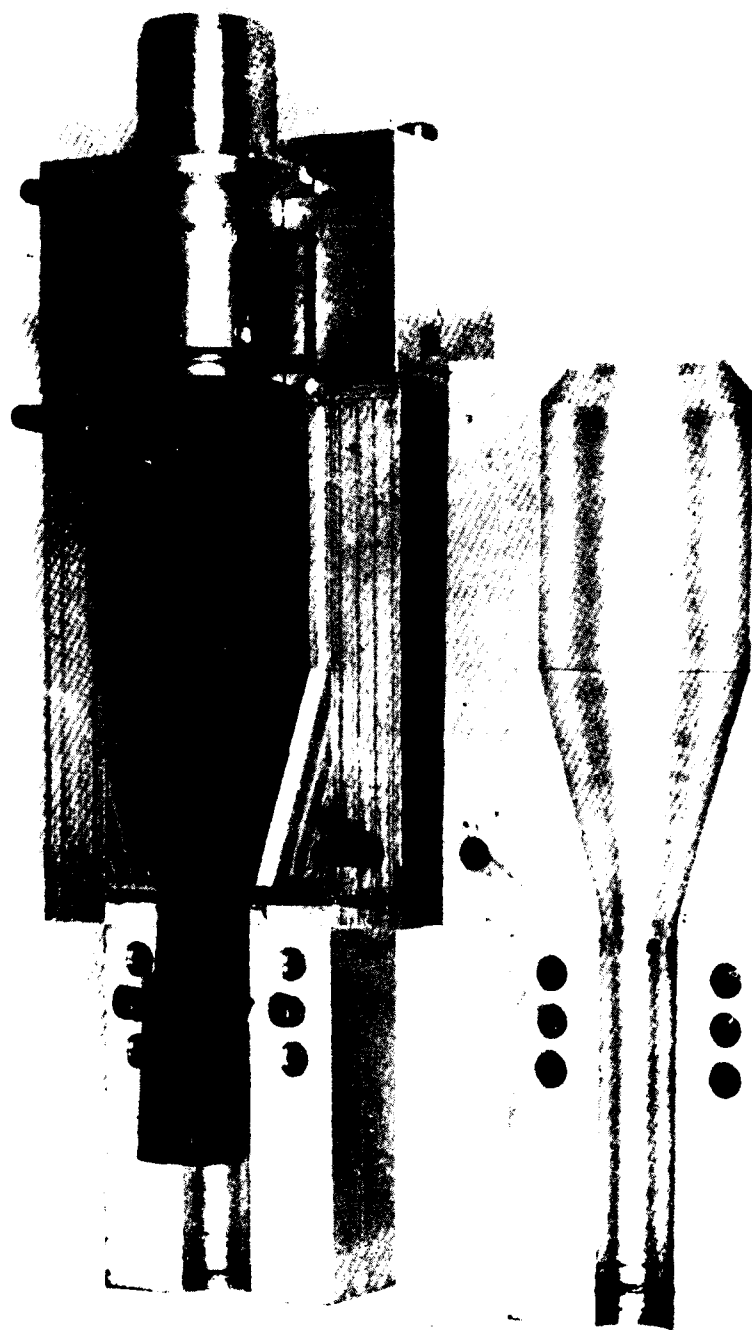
TYPICAL NEOPRENE MOLD ASSEMBLY
